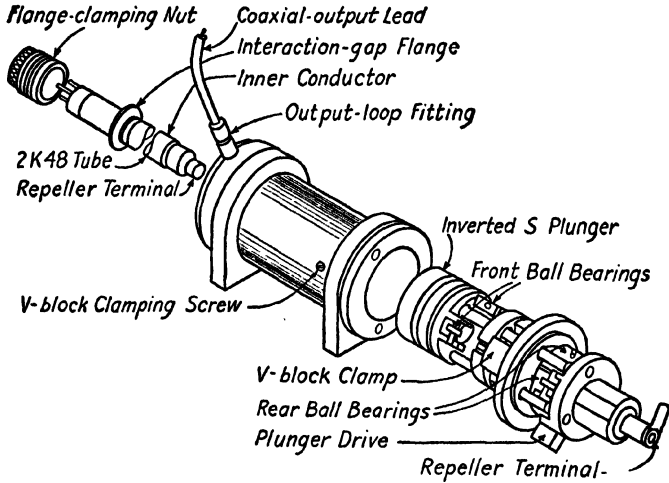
Exploded view of 6.6- to 10.7-kMc oscillator.
